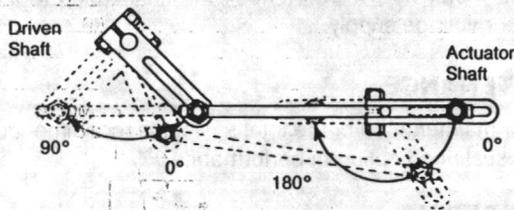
Linkage for 180° Actuator Shaft Rotation for 90° Damper
